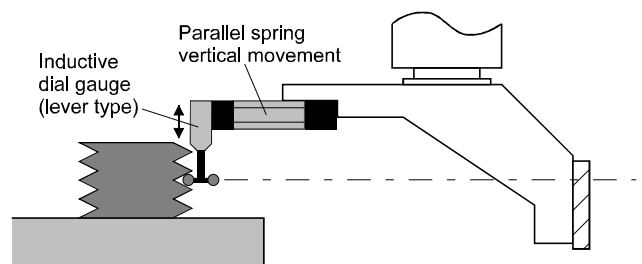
Measurement head for the calibration of the pitch diameter of internal and external screw gauges.
